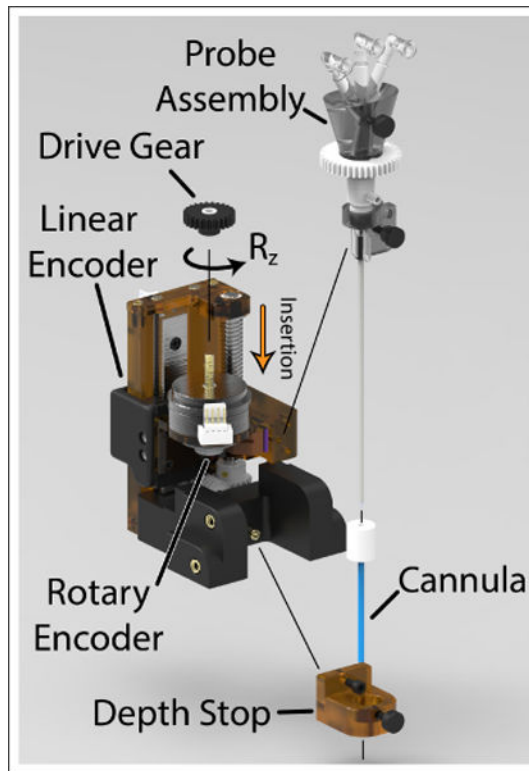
Exploded view of the needle driver assembly indicating parts removable for sterilization. During a surgical procedure, the needle driver and robot arm are covered in a sterile drape. A sterile pack containing the probe assembly, R_z drive gear, depth stop, and cannula is provided to the surgeon and attached over top the sterile drape.
